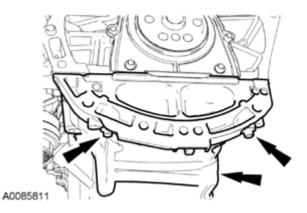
Locating Silicon Gasket And Oil Pan Bolts Courtesy of FORD MOTOR CO.
